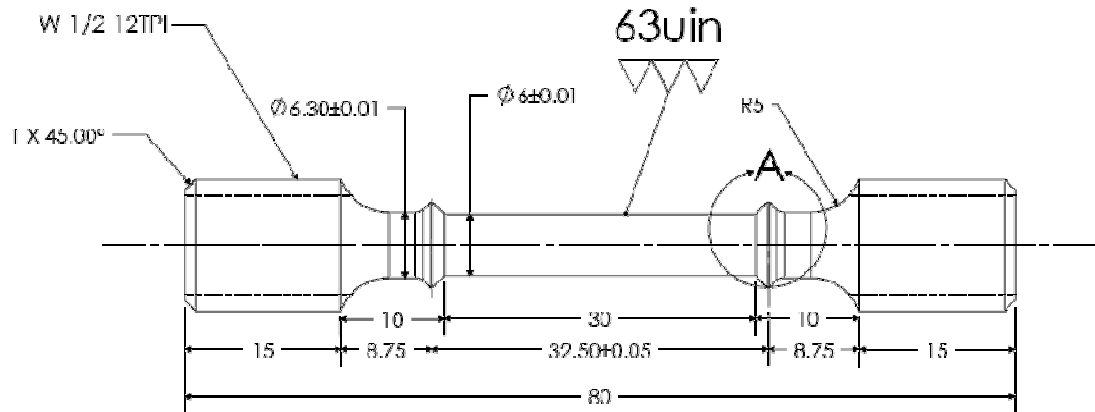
ASTM Standard E-139-96 creep test specimen specifications (dimensions in mm)[29].
